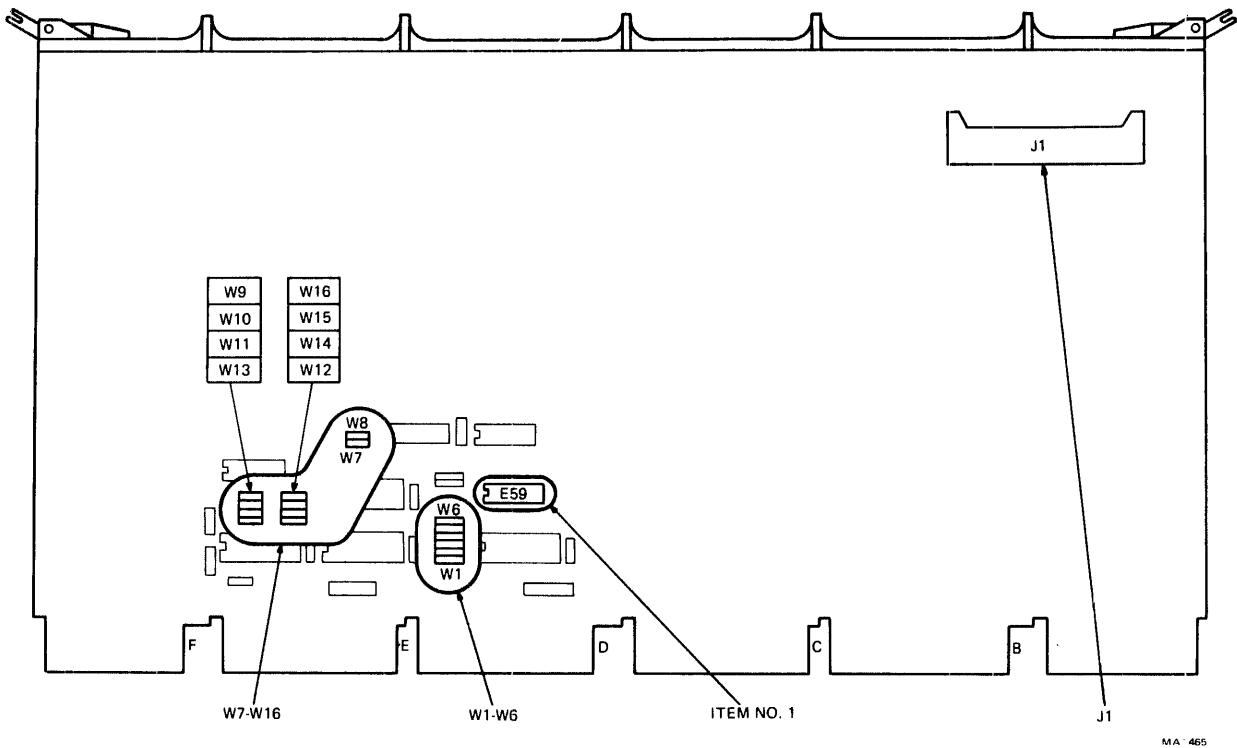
RL11 Component Layout (Sheet 1 of 2)
